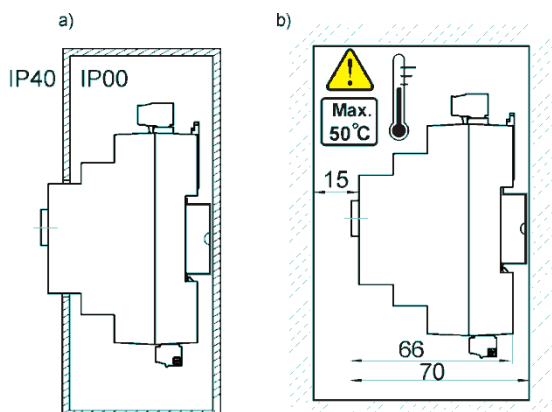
Methods of module installation: a - in modular housing with access to front surface, b - in the cover without access to front surface.
